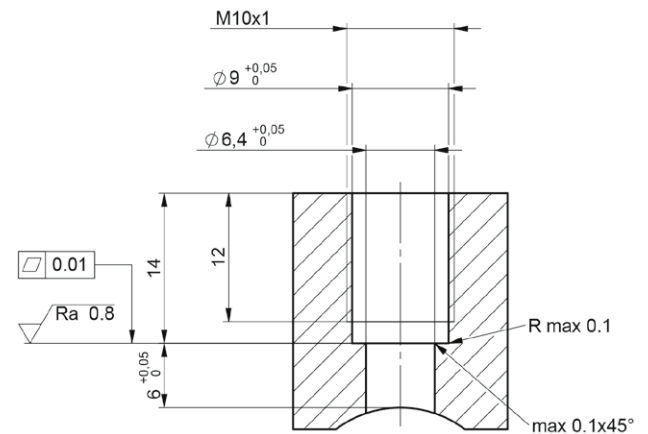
Mounting bore dimensions for tangential / flush mounting of Type 6239AAA (M10x1 thread)
